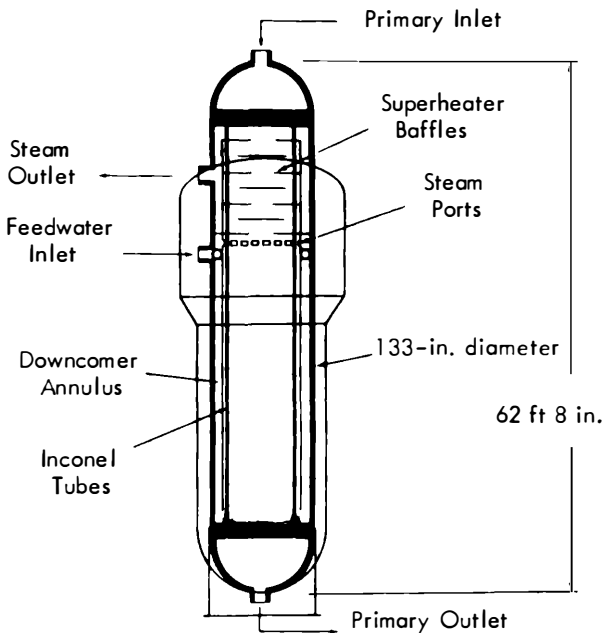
Once-through steam generator; recirculating unit shown in outline [from Ref. 9].
